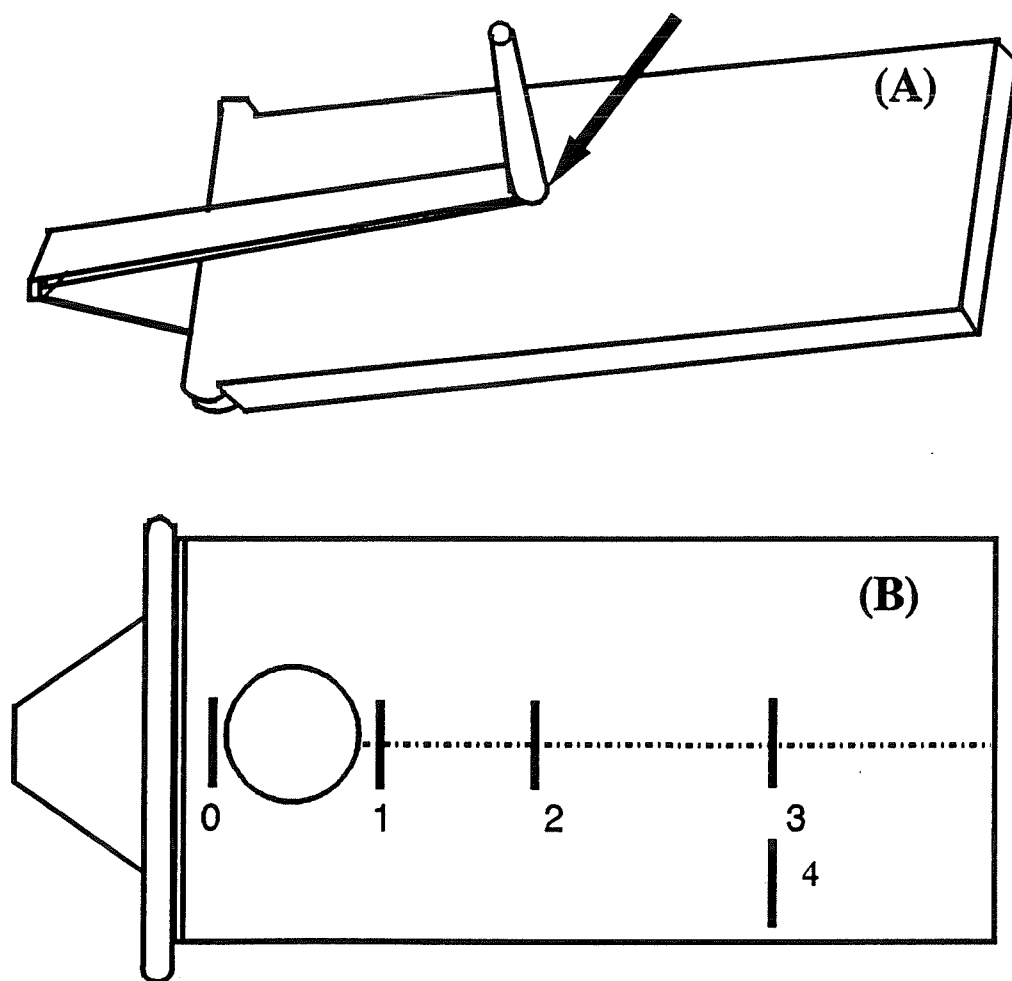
Injection molded plaques, shape and positions at which samples were taken
